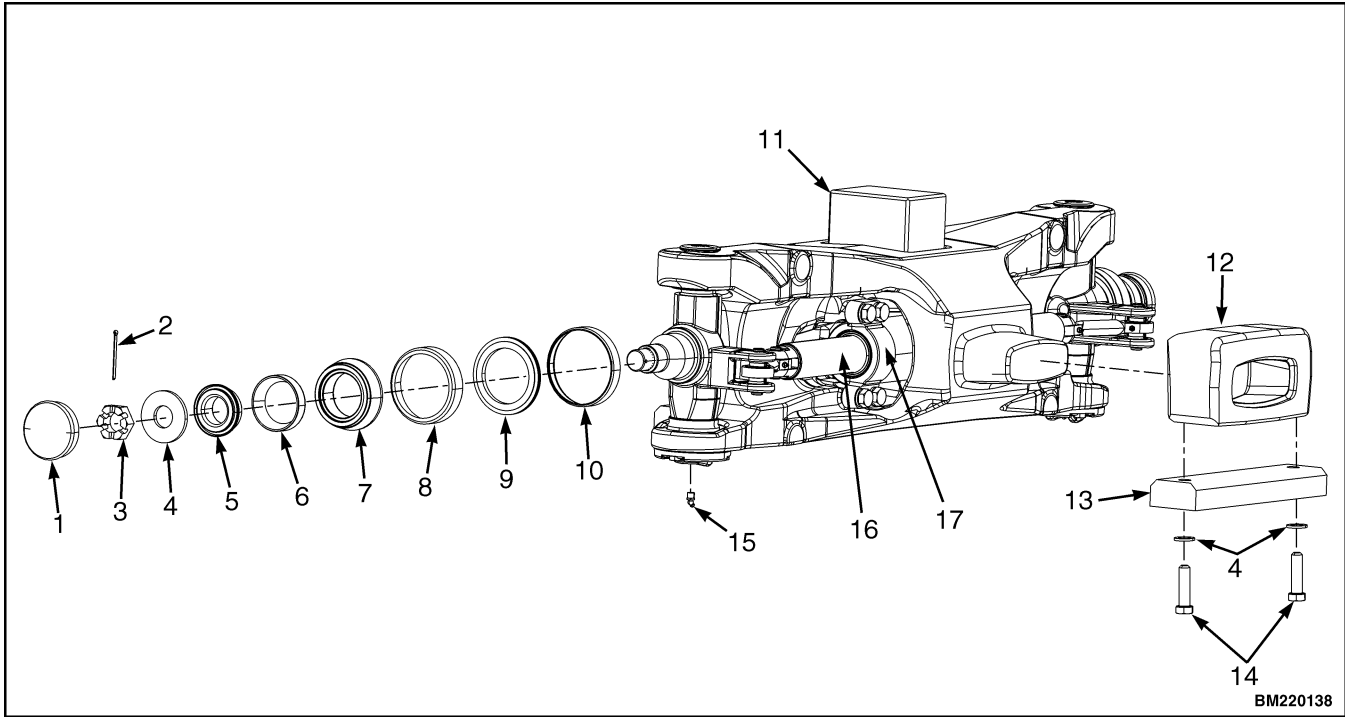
Spindle to Tie Rod Assembly for Lift Truck Models GLC40, 45, 55VX; GLC55SVX; (GC/GLC080, 100, 120VX; GC/GLC080, 100VXBCS; GC/GLC120SVX; GC/GLC120VXPRS) (E818, F818)
